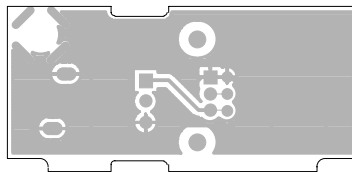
U003 Sensor PC Board (Bottom side)
